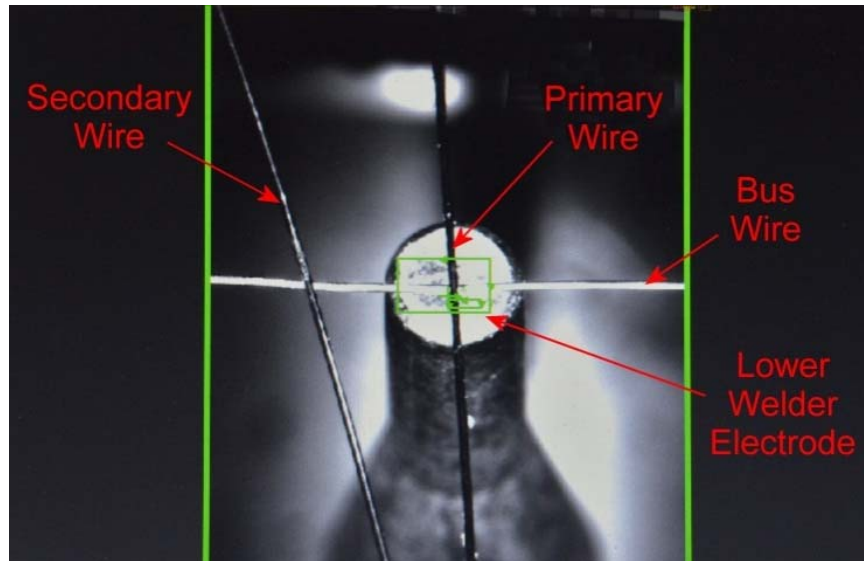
Vision system screen with a Primary OPV wire in place for welding
